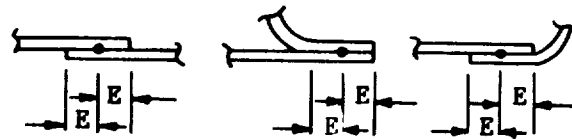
Edge Distances for Spot-Welded Joints.
